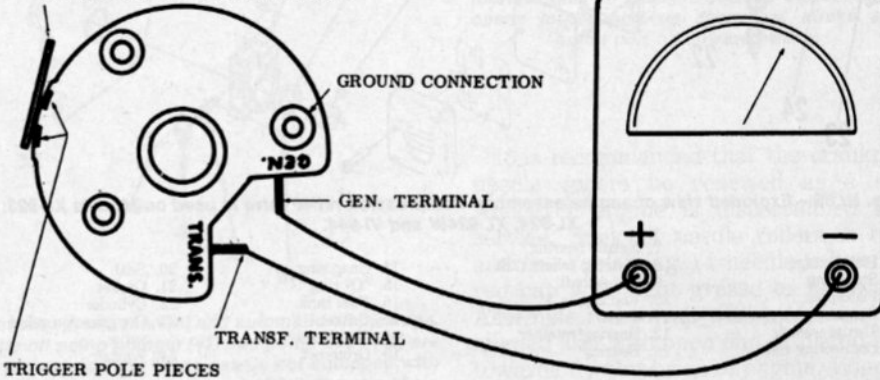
Drawing showing volt-ohmmeter connections to ignition module (3—Fig. HL84) for checking module. It should be noted that this is not a conclusive test and module should be renewed in event of spark failure when other magneto components test OK.
